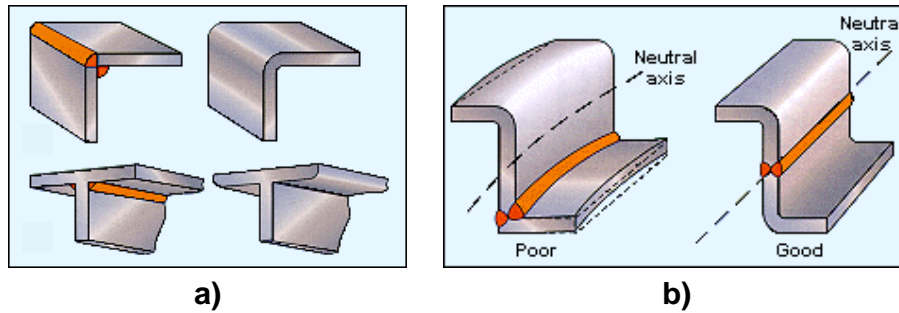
Residual stress management by design a) elimination of welds b) positioning welds along the neutral axis [8]
